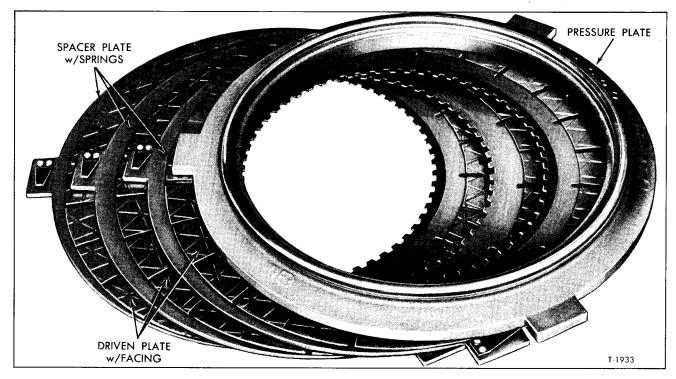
Spacer Plates, Driven Plates, and Pressure Plate Assembly Sequence
